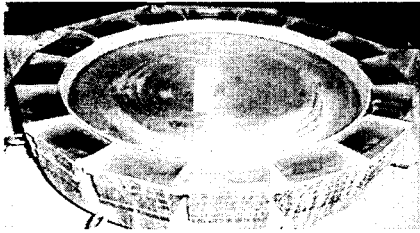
Large optics polishing machine with Shack-Hartmann on-machine measuring system
